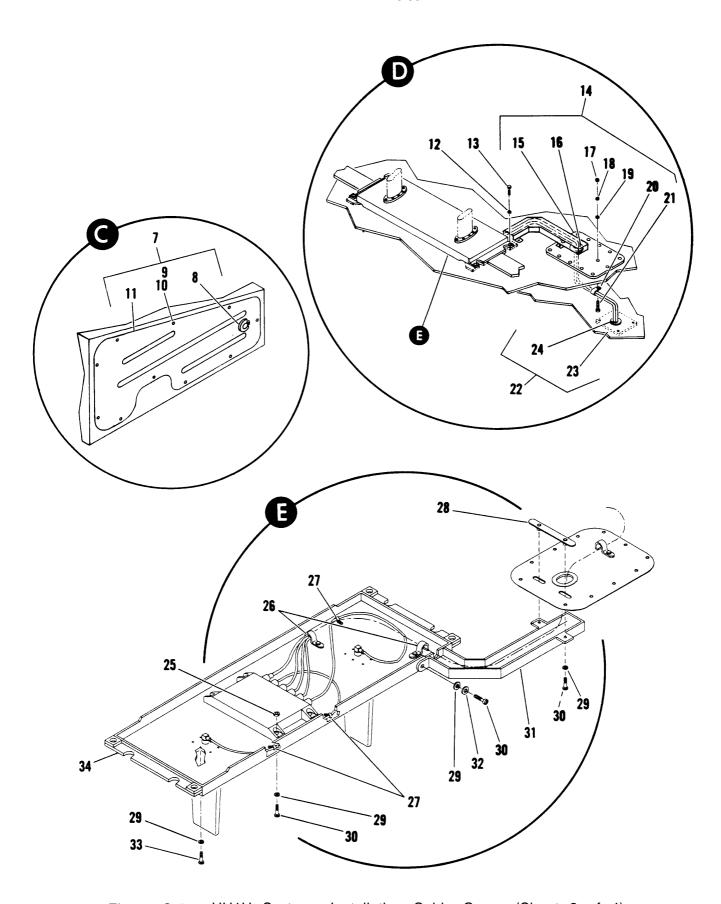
UH1H Systems Installation Cable Group (Sheet 2 of 4)
